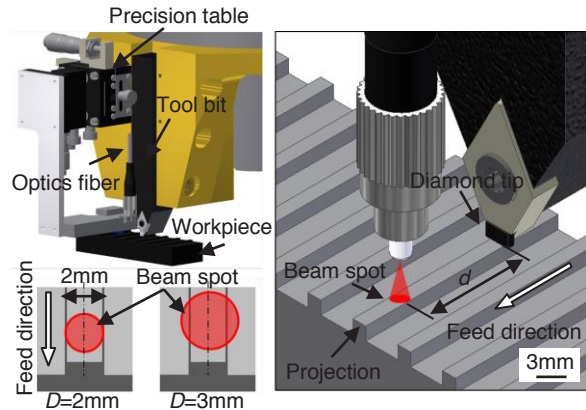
Schematic and actual view of laser-assisted machine tool.
